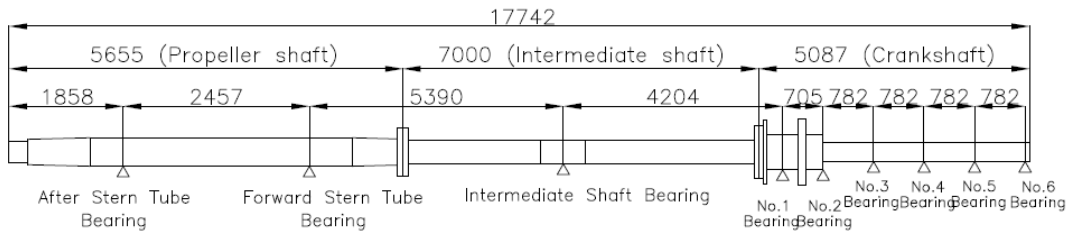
Shaft alignment system on 950 TEU container carrier
